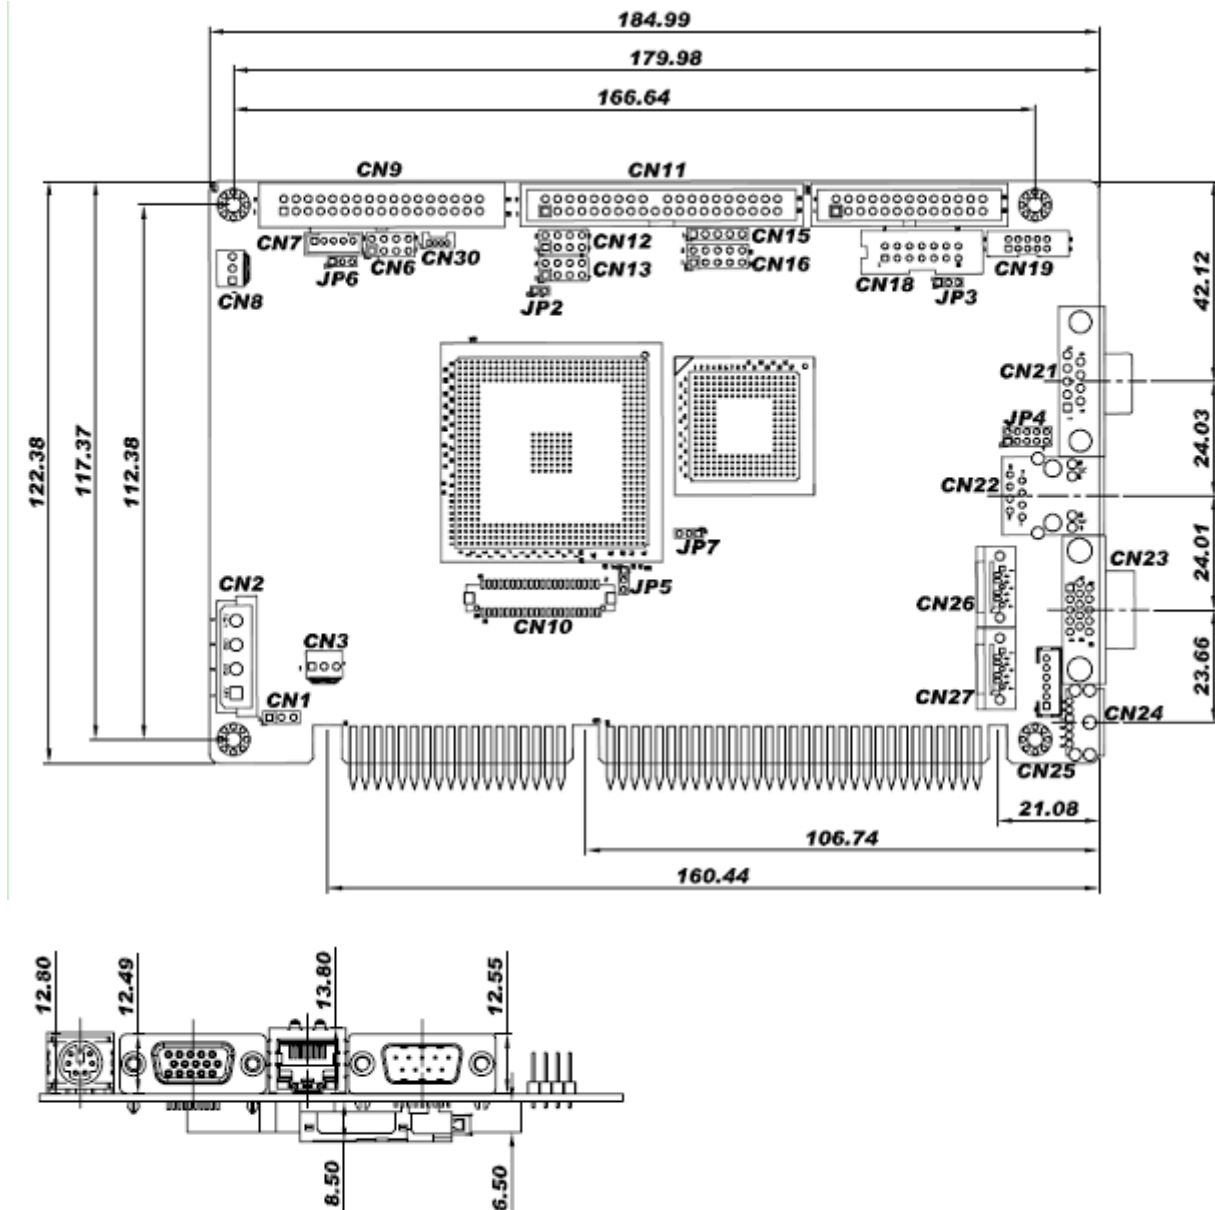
IOWA-LX-600 Dimensions (mm)
